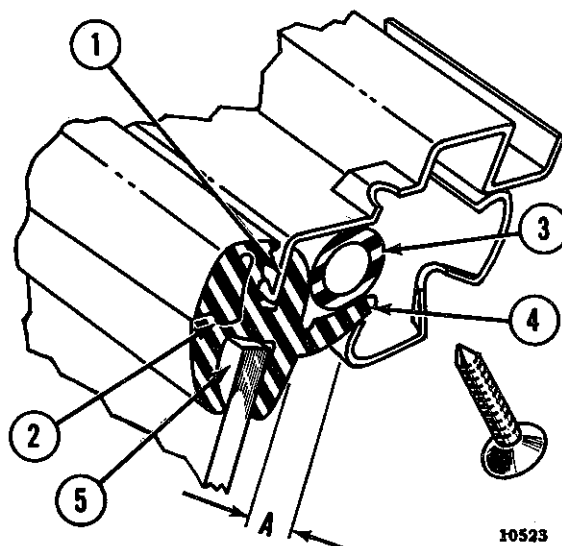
ONE-PIECE WINDSHIELD WEATHERSTRIP
